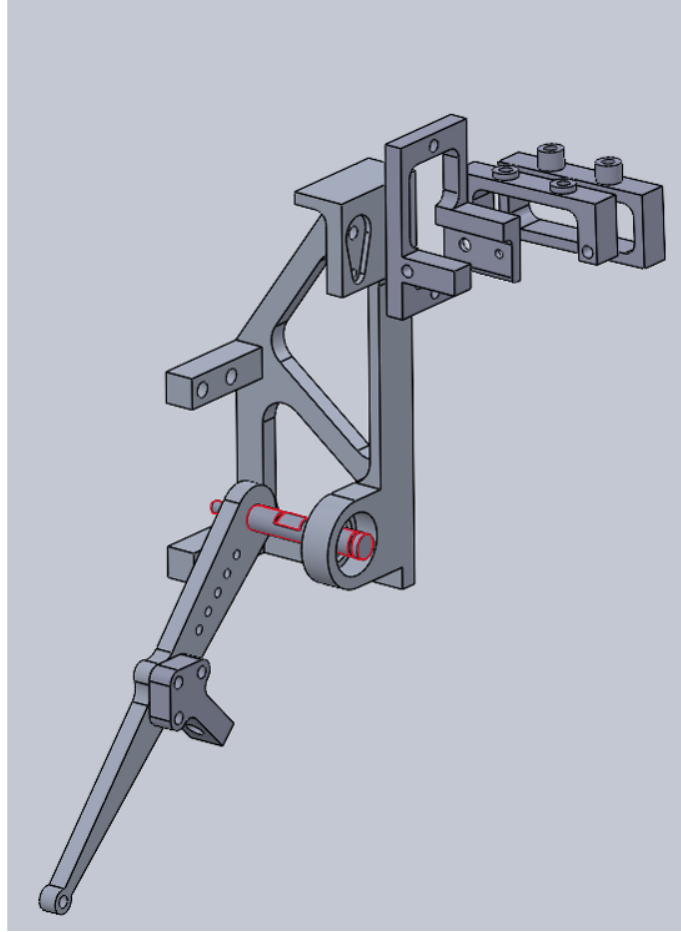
An overview of the CAD model of the leg design, but showing only the components that will be manufactured inhouse. Axel that will be threaded and screwed directly into the motor shaft, and lead directly into a ball bearing, is emphasized in red.
